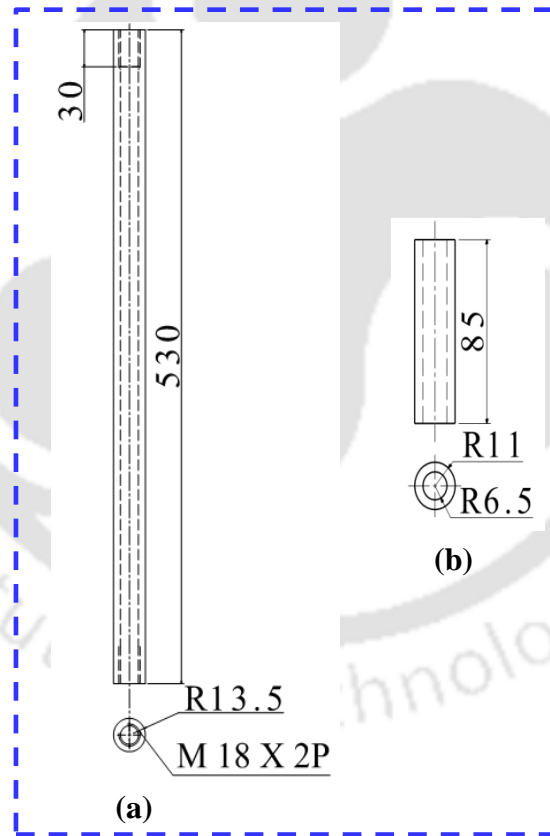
Detailed 2-D drawing of (a) supporting rod (b) spacer (All dimensions are in mm).
